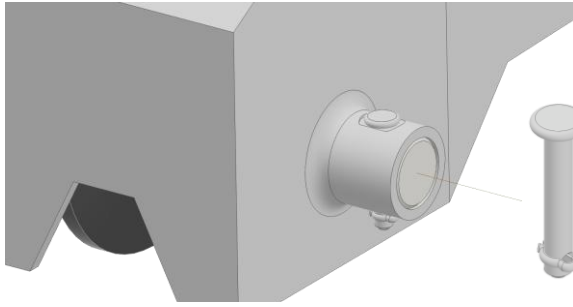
/End truck wheel shaft locking mechanism/
